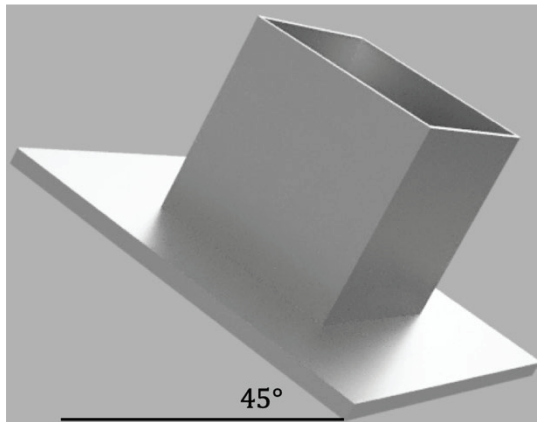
Part used to test non-gravity aligned welding techniques
